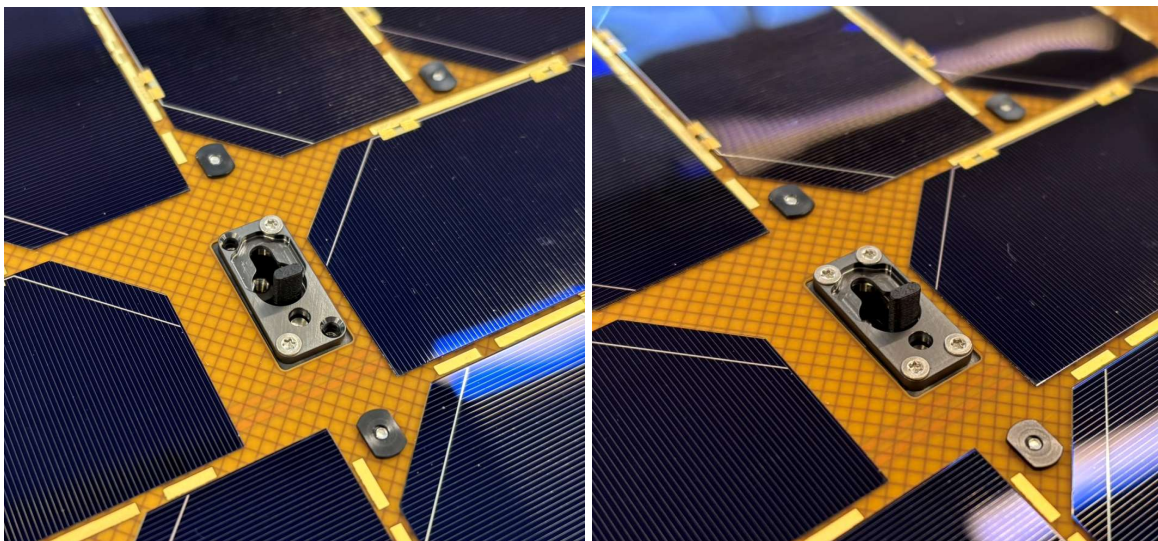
Thread locker and final torque applied to HDRM-Panel part.
